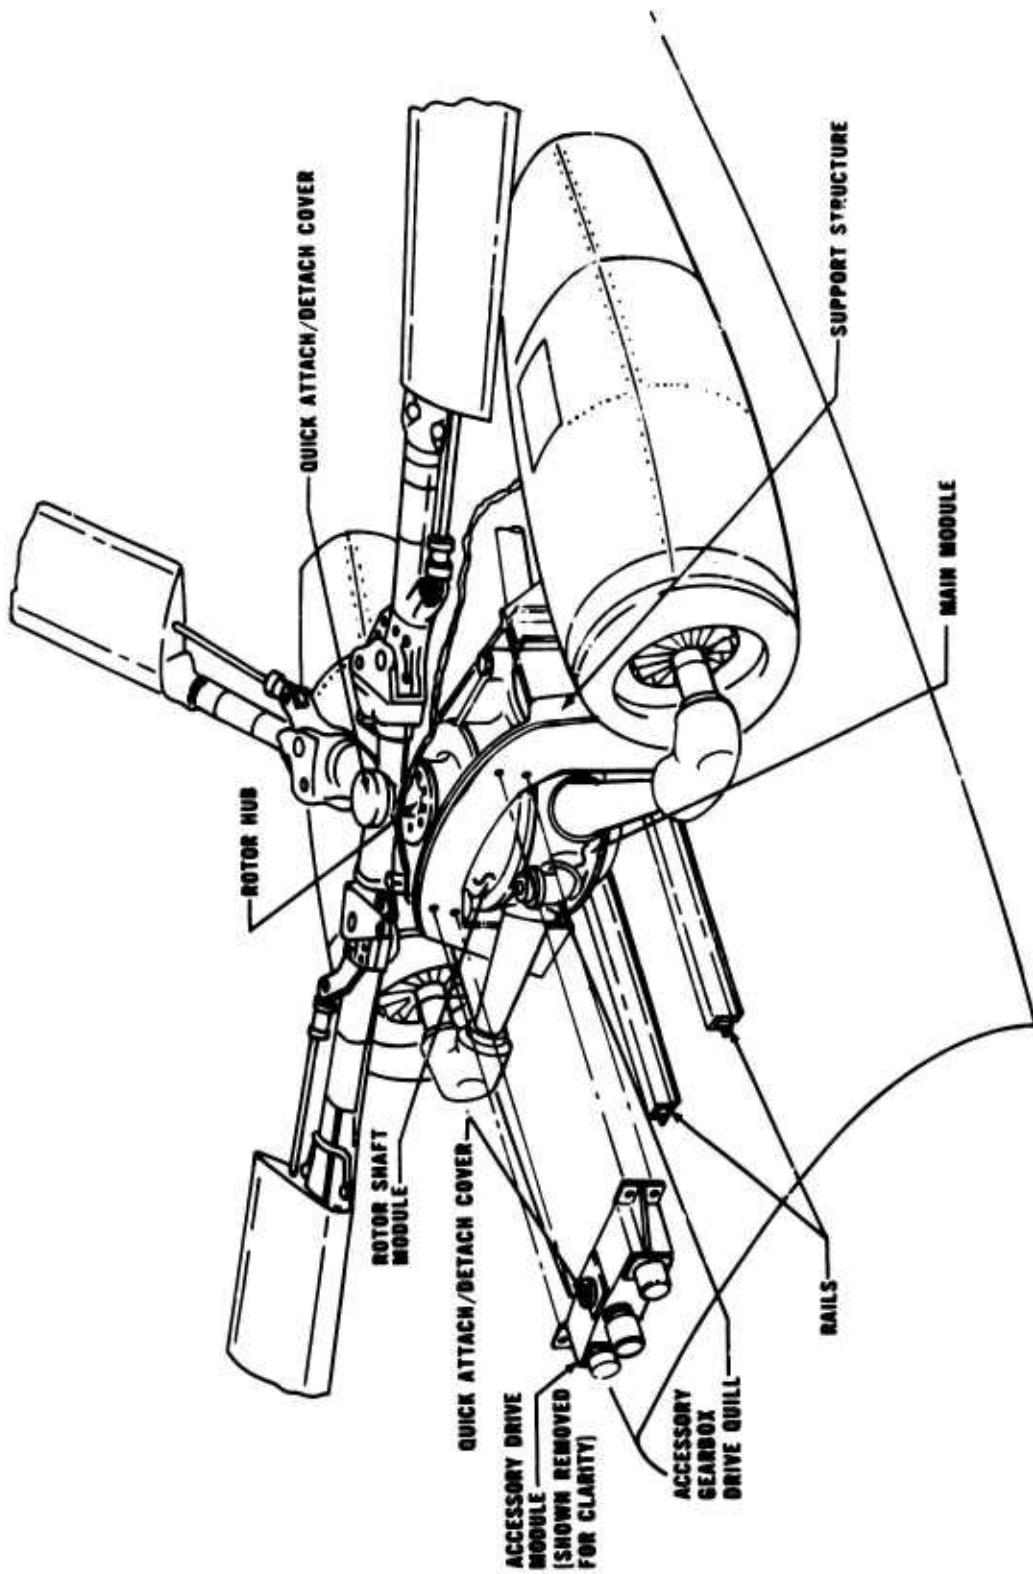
Modularized Main Transmission, Showing Accessory Drive Module Being Removed.
